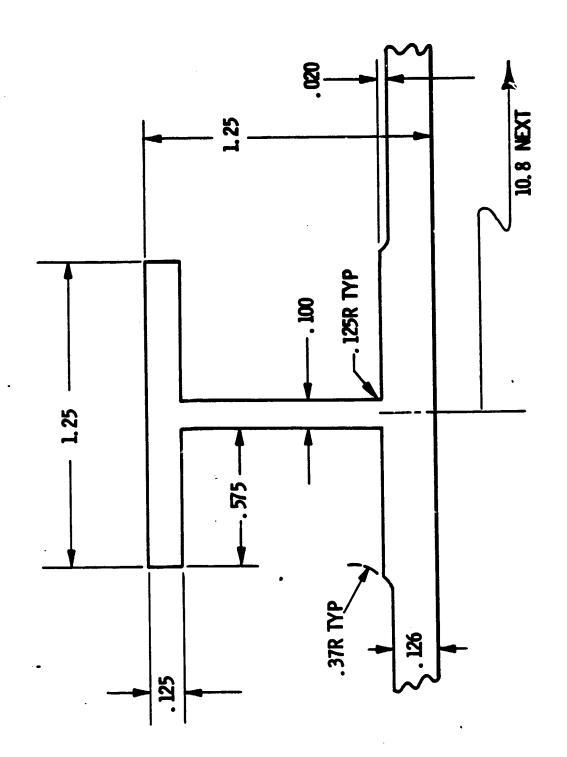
Section View of T-Rib Reinforcement of Fuel Tank Panel
